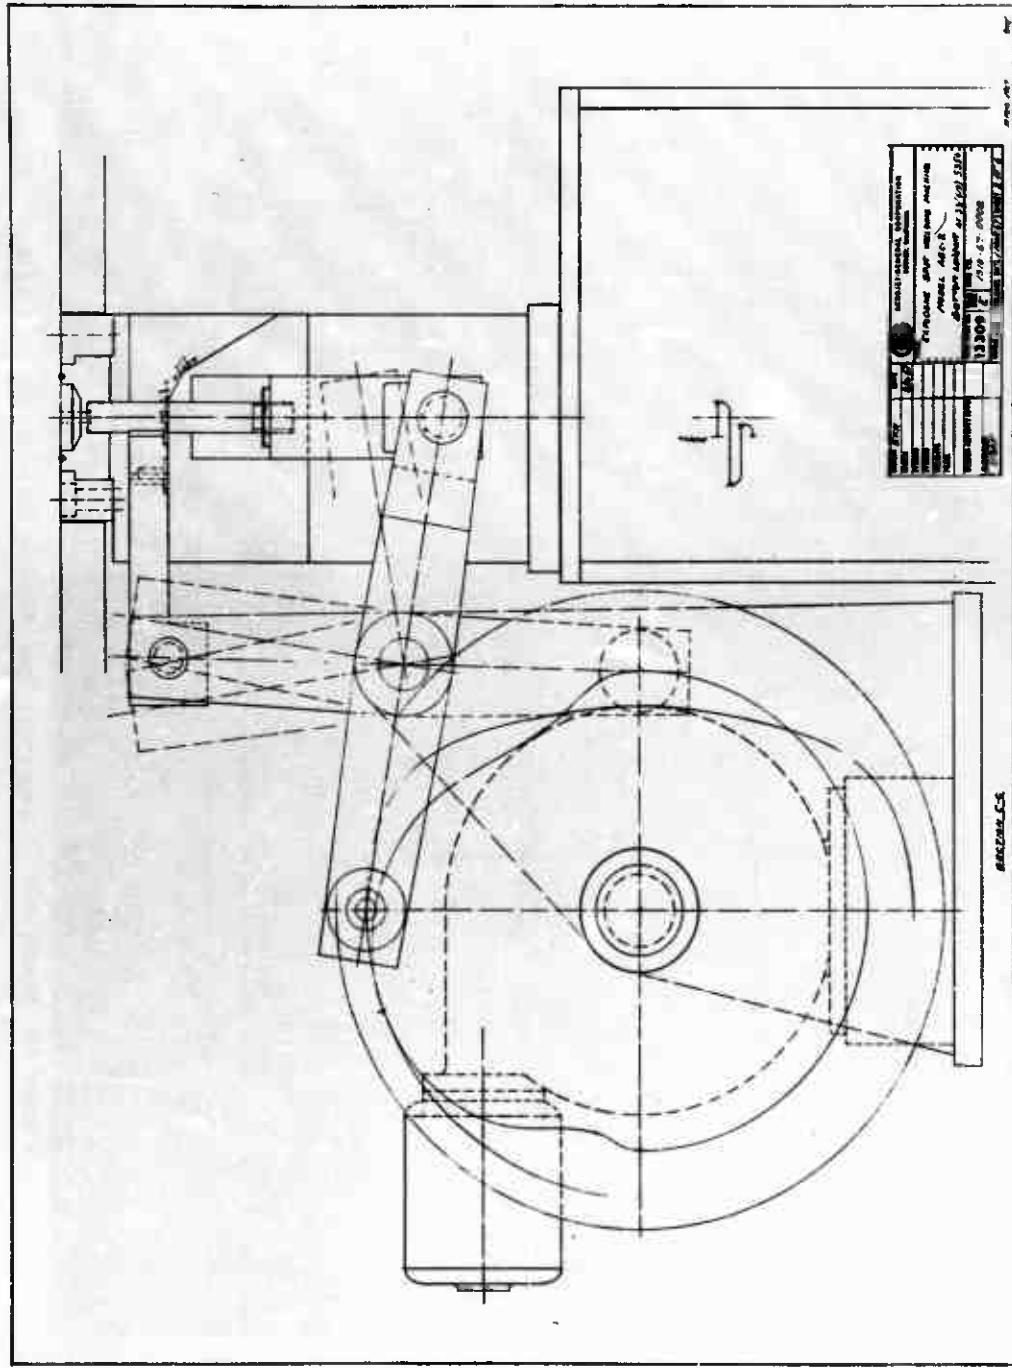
Model AGC-2 Explosive Spot Welding Machine (Sheet 2 of 4).
